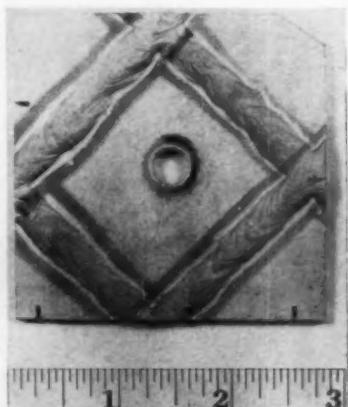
Welded Specimen, Ready for Insertion in the Test Rack
